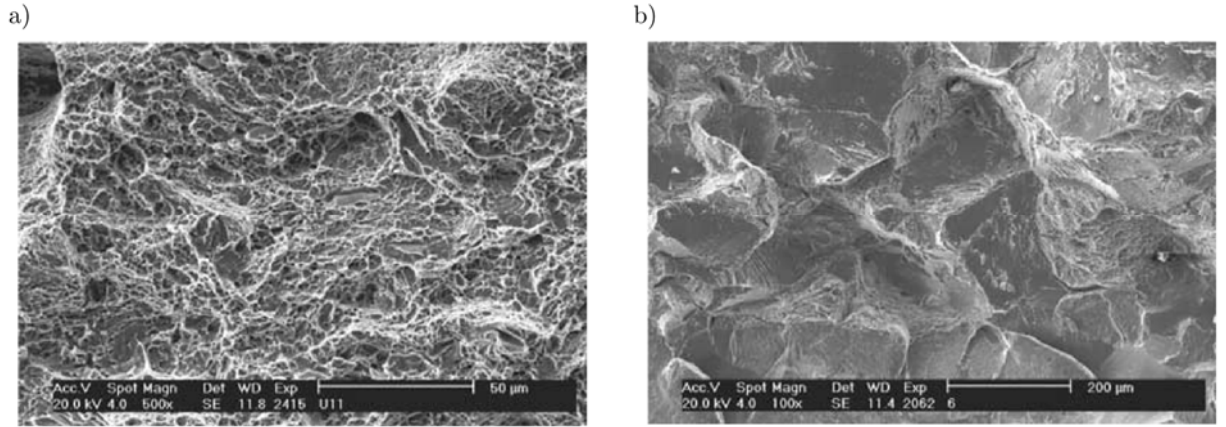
The fracture surface morphology (two different fracture mechanisms: a) - transgranular, b) - intergranular) [10]
